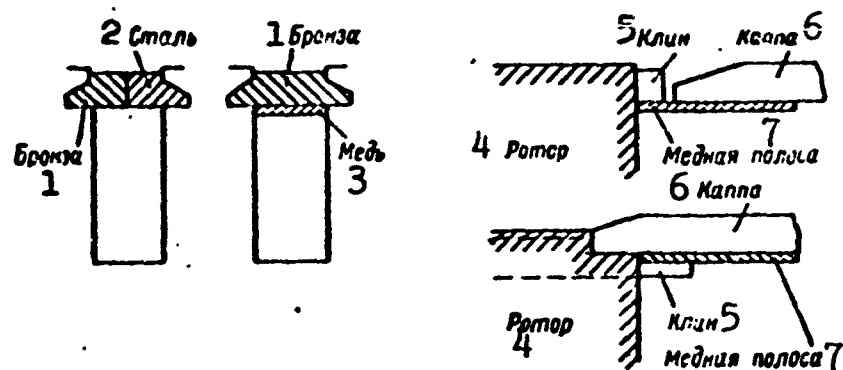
Damper cages for nonsalient-pole machines. 1) Bronze; 2) steel; 3) copper; 4) rotor; 5) wedge; 6) cap; 7) copper strip.
